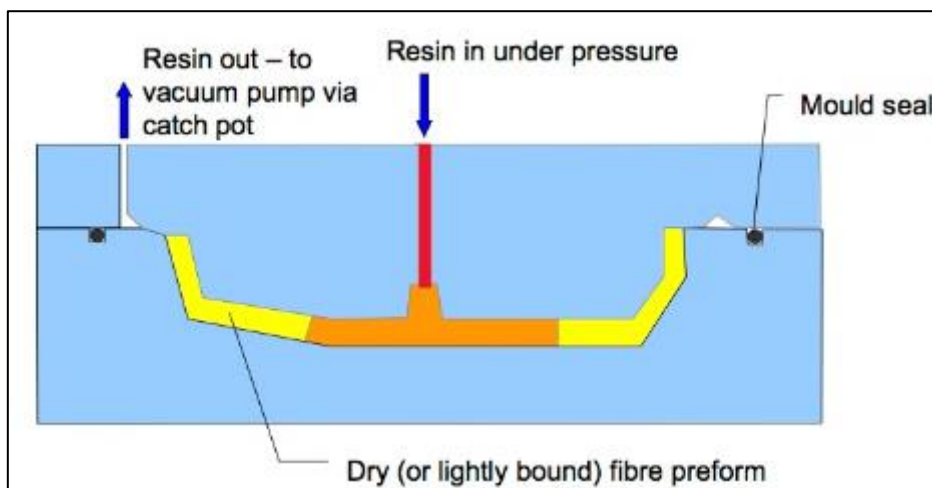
Resin Transfer Moulding (RTM) schematic [61]
